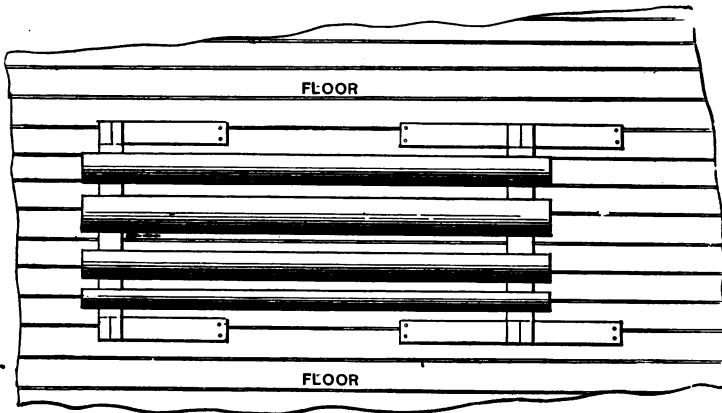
Plan View of Former, Showing Pipes in Position.
